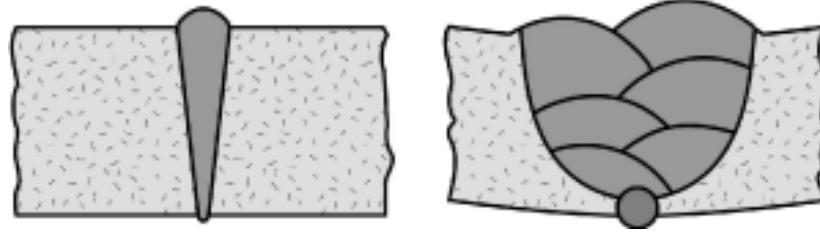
Cross sections of welds performed with (a) EBW and (b) TIG [11].
